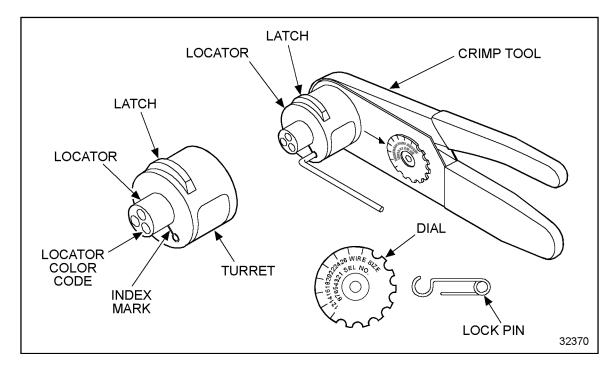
Hand Crimp Tool for 37-pin Connector Terminals
